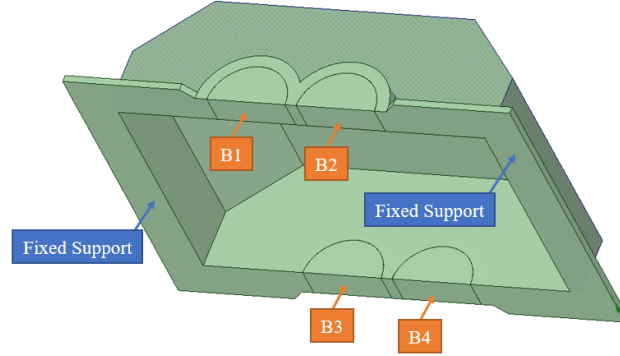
Location of the excitation for each bearing: Bearing 1 (B1), Bearing 2 (B2), Bearing 3 (B3), Bearing 4 (B4); and the Fixed Support Boundary Conditions.
